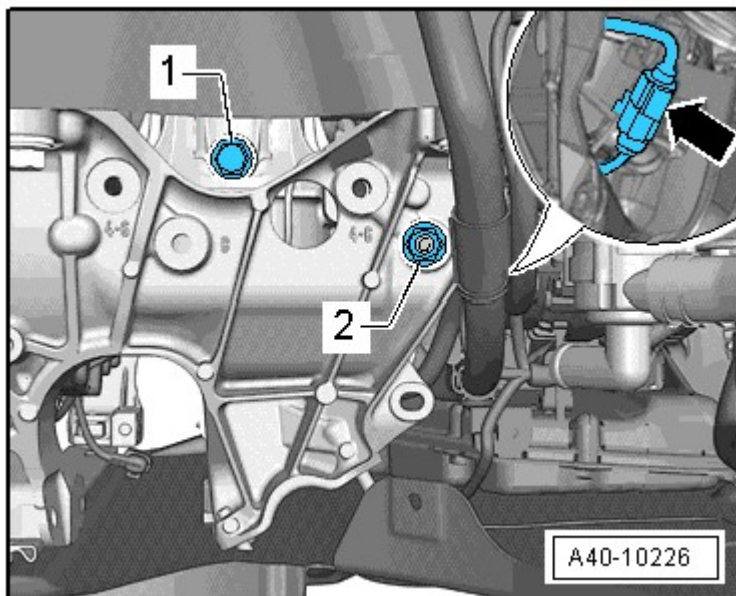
Disconnecting Left Electrohydraulic Engine Mount Solenoid Valve
